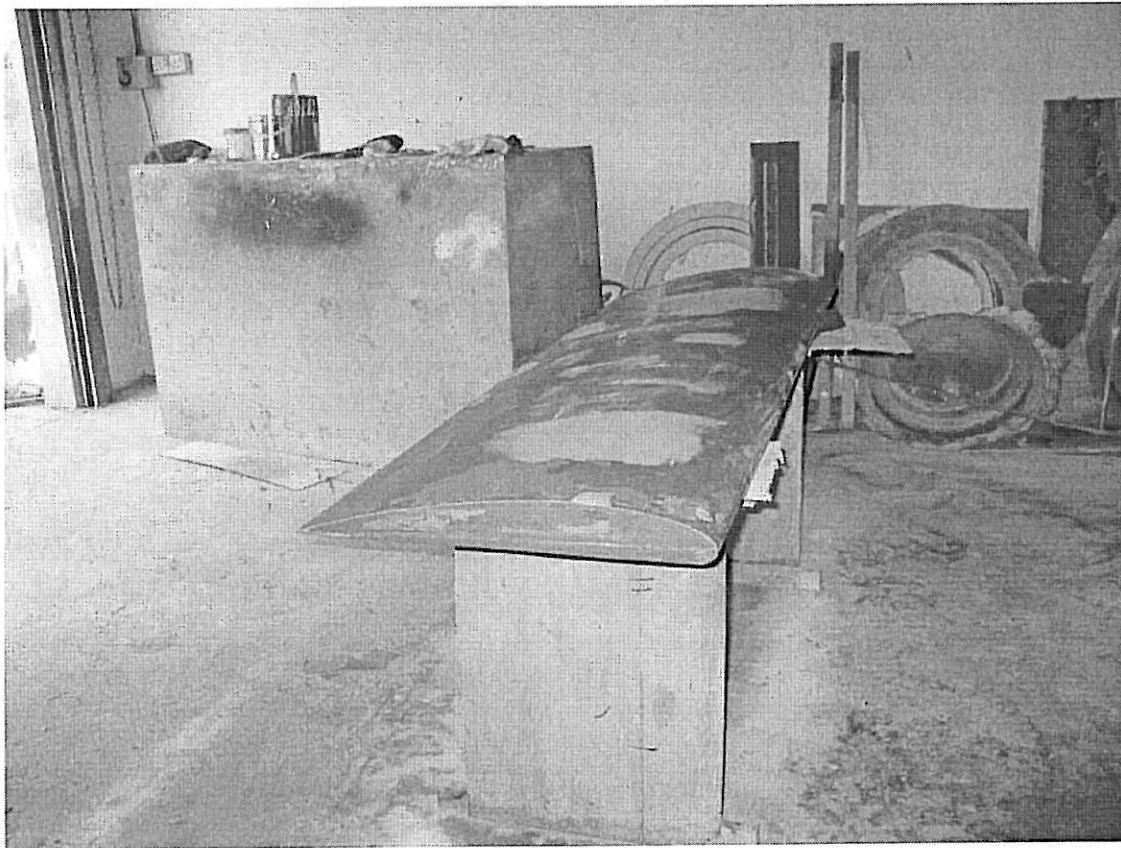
Wood pattern is painted using primer. (The none-uniform picture is because the picture was taken after mould fabrication).
